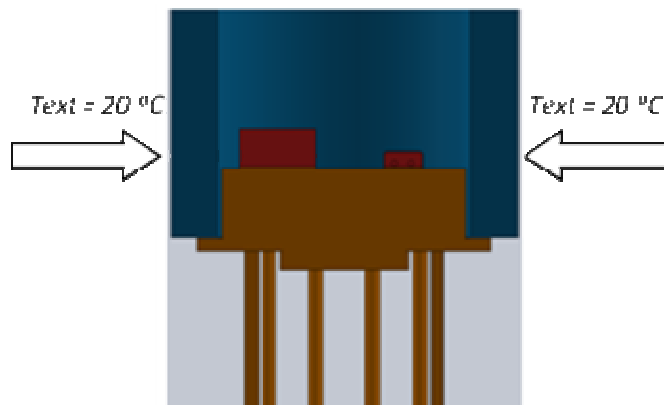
Cross section of the metal shell in contact with the TO Header.
